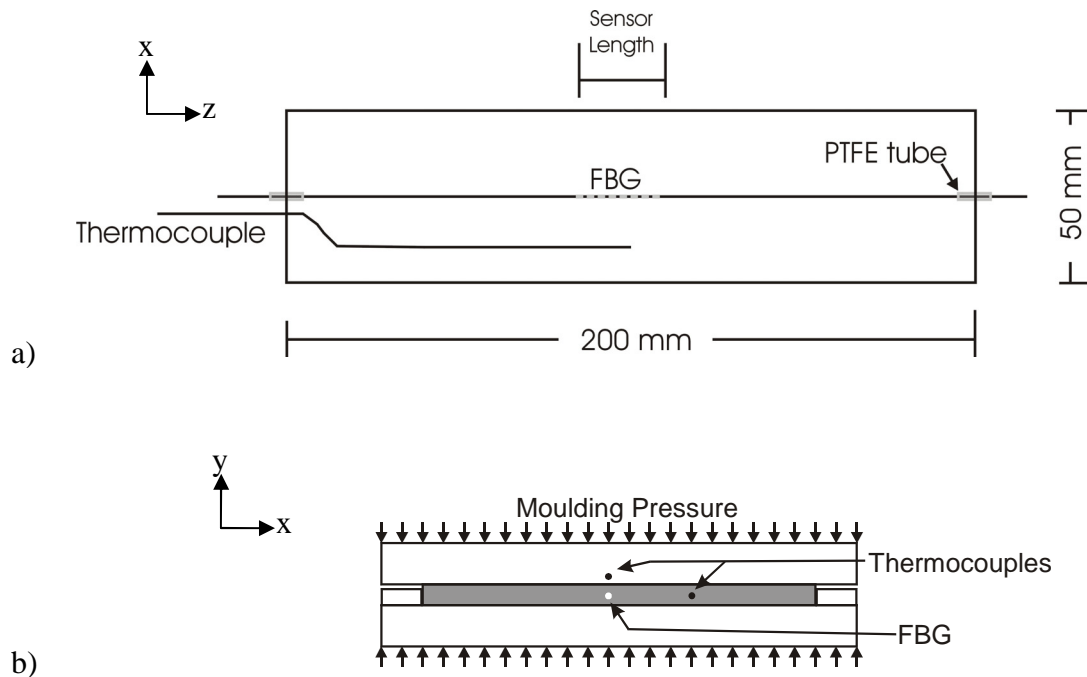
a) Top view of composite plate lay-up and b) cross-sectional view of plate in the mould
